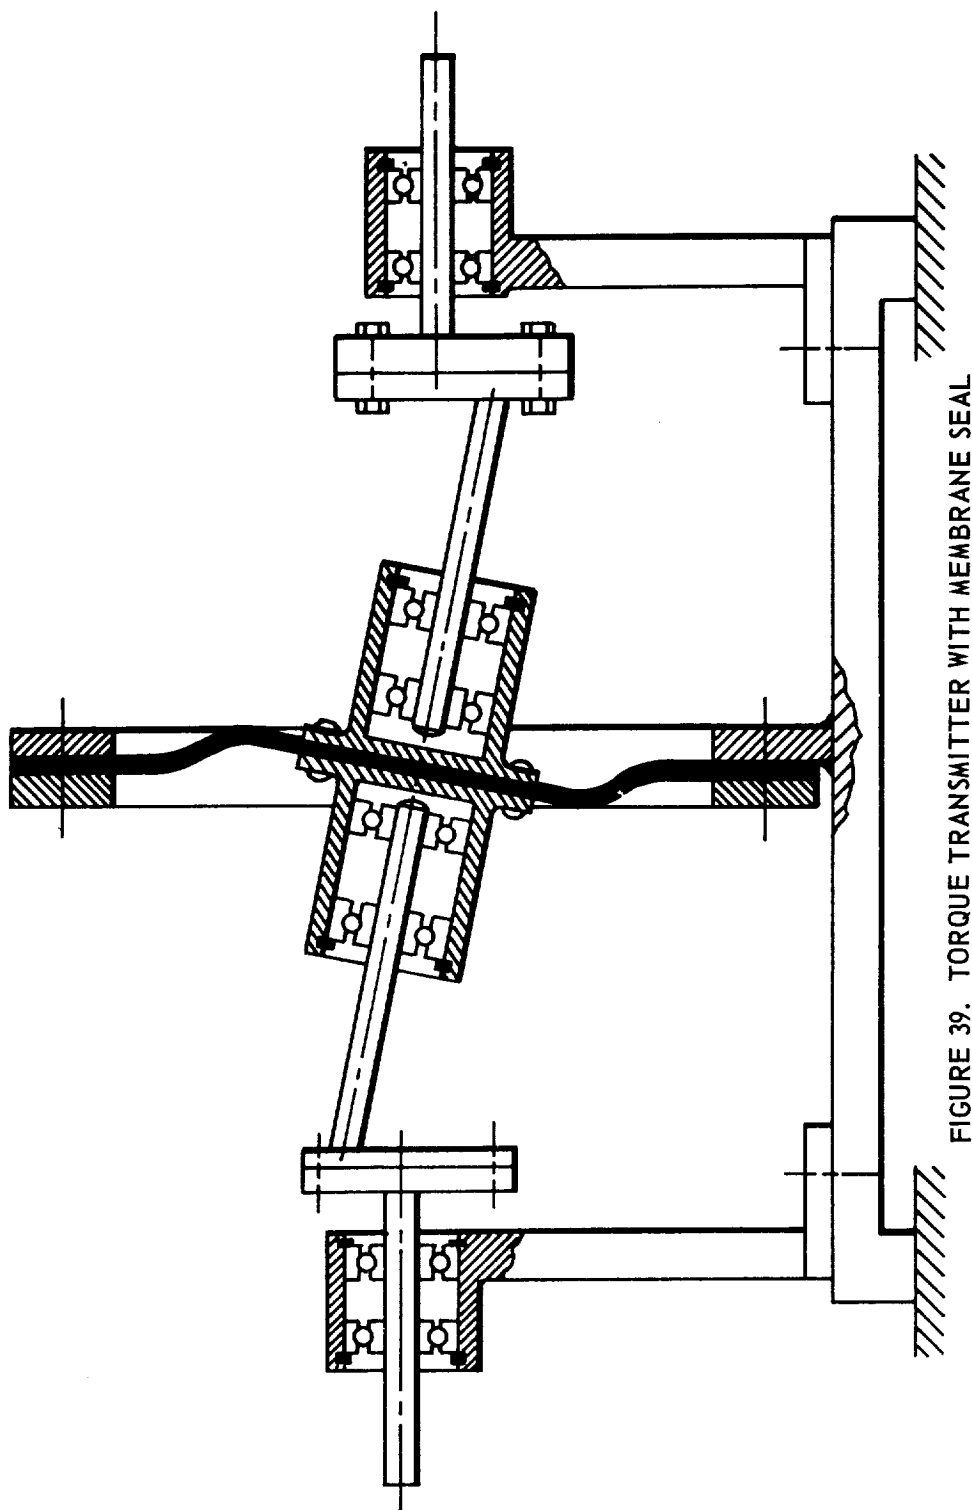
TORQUE TRANSMITTER WITH MEMBRANE SEAL
